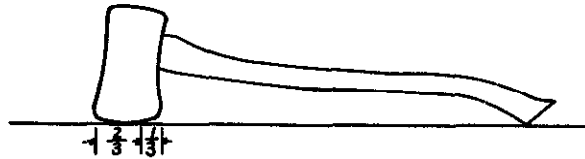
This illustrates how an ax handle should fit to give the proper position to the cutting edge of the ax.
